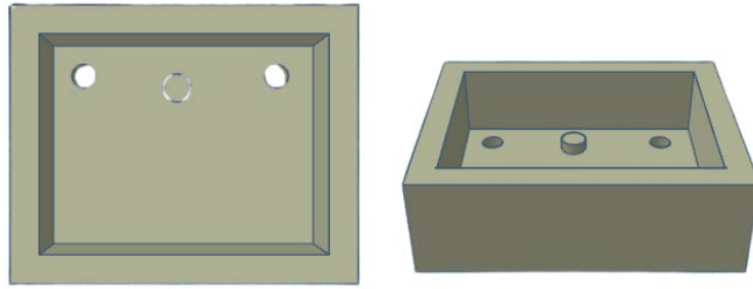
3D Accelerometer Case to use for MPU6050 Board Sensor
